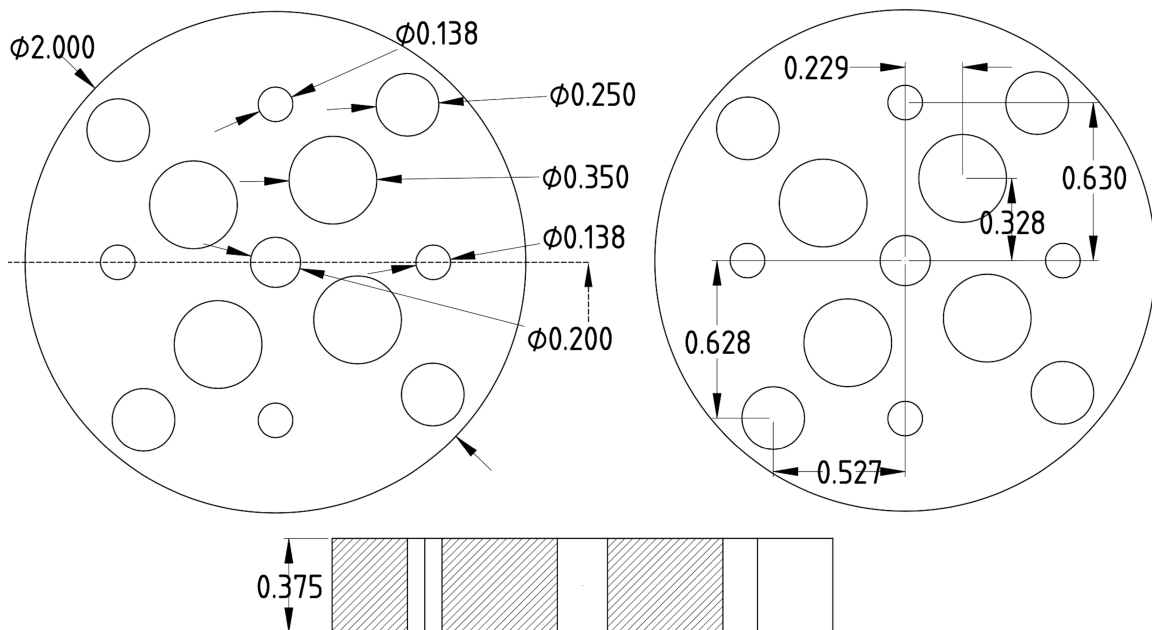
Engineering drawing of 6061 aluminum round of upper carousel. Through holes for other quadrants are 90° apart measured from center. Units are in inches.
